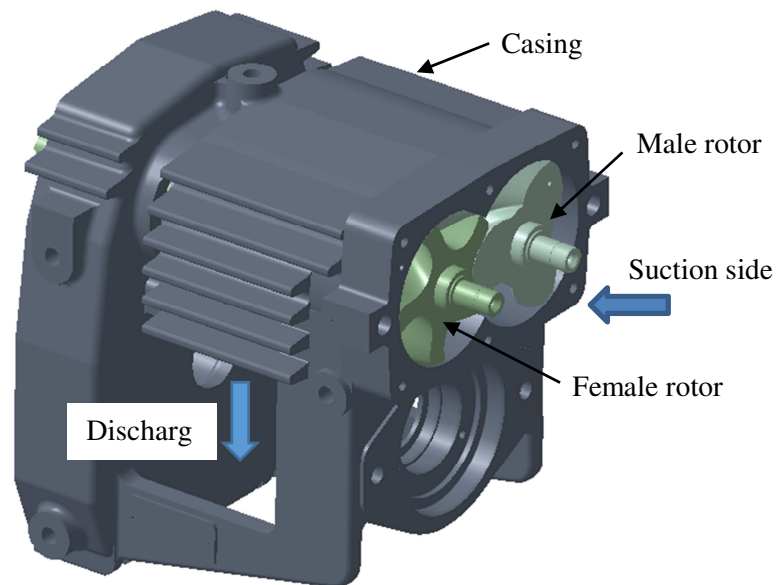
3D model of the main casing and rotors of the oil free twin screw compressor
